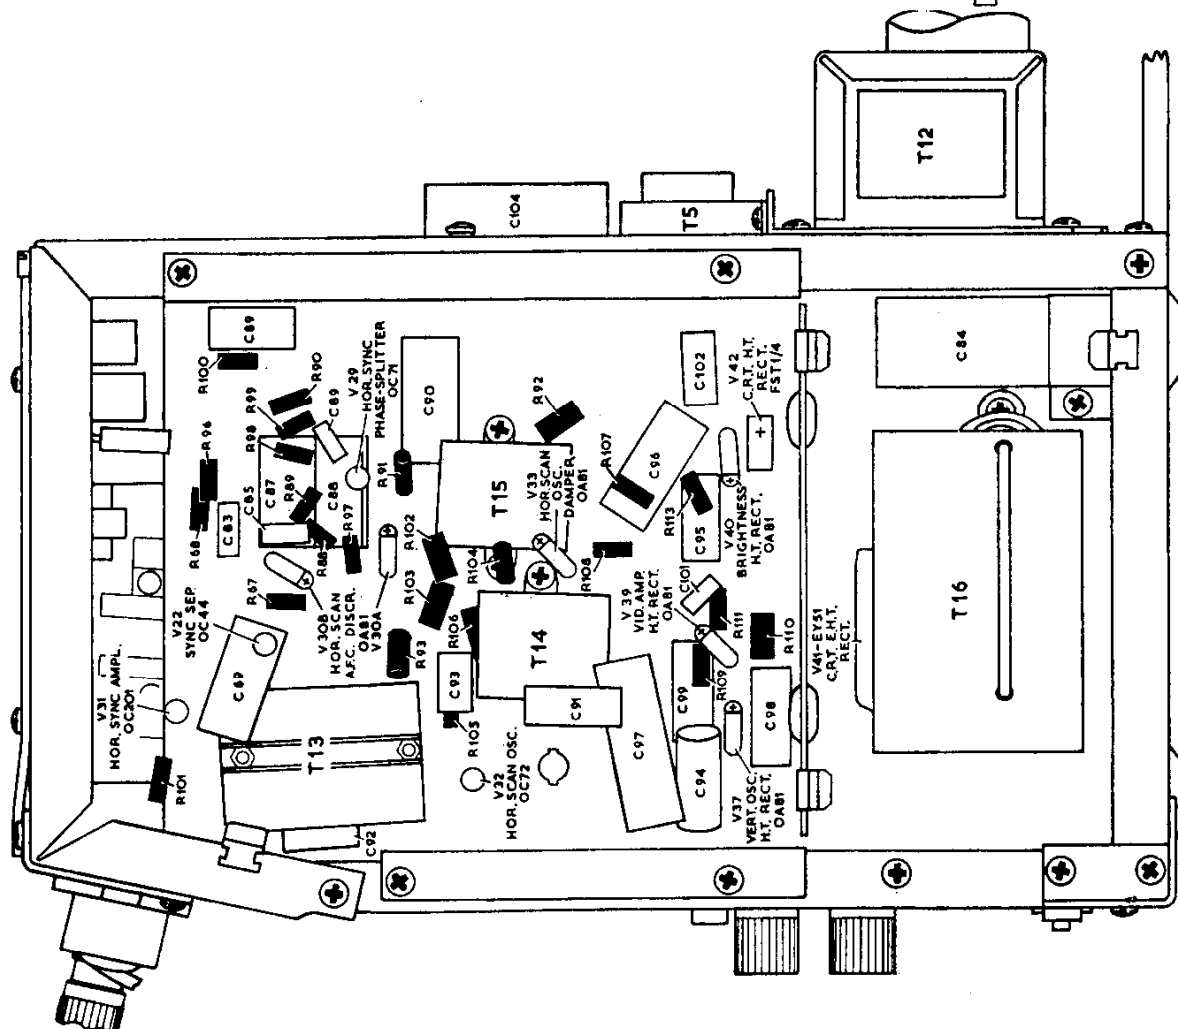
CHASSIS RIGHT-HAND SIDE ELEVATION
